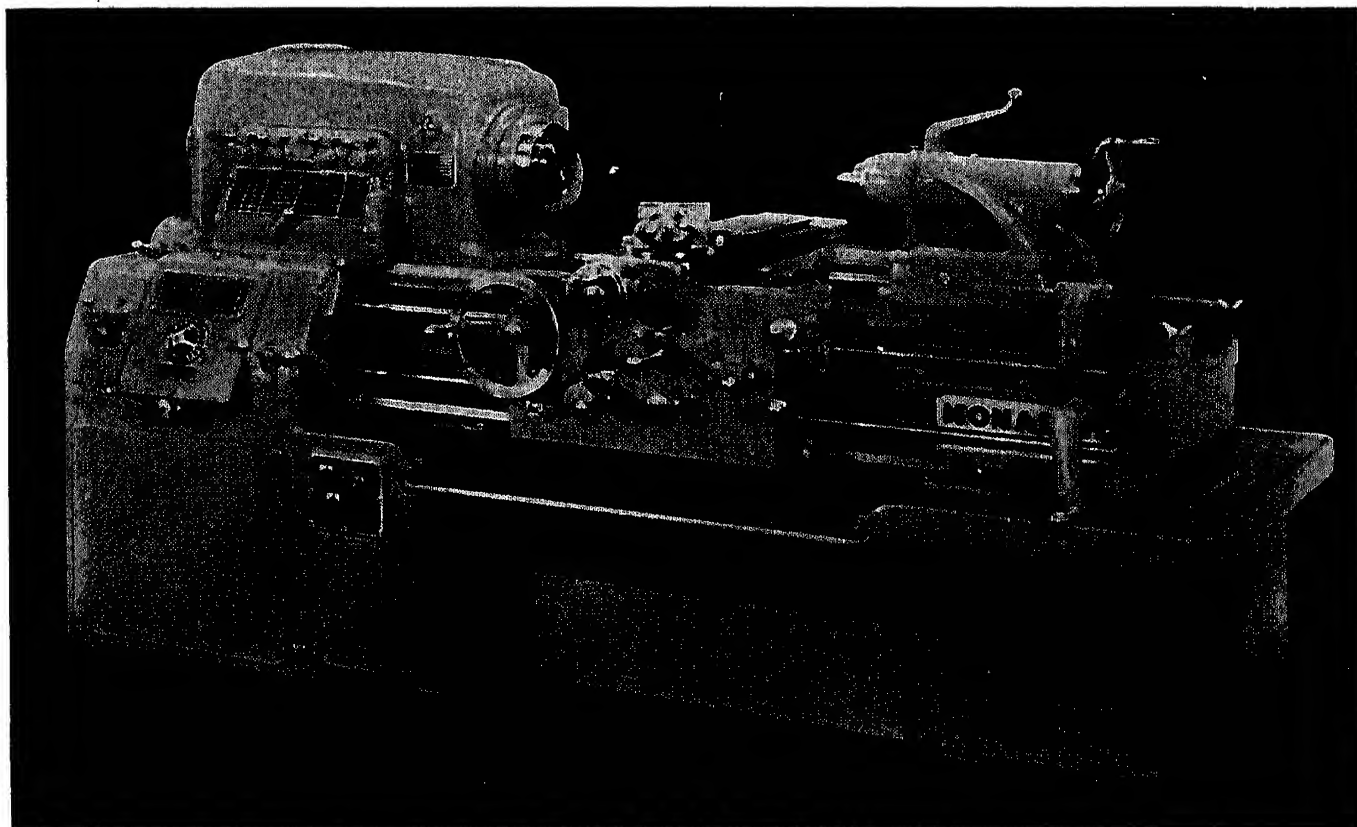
A 20 in. completely geared engine lathe. (Courtesy The Monarch Machine Tool Co.)
